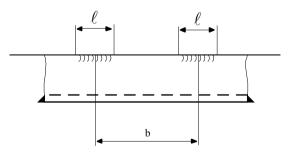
Intermittent fillet welded joints between web and flange of bending girders
